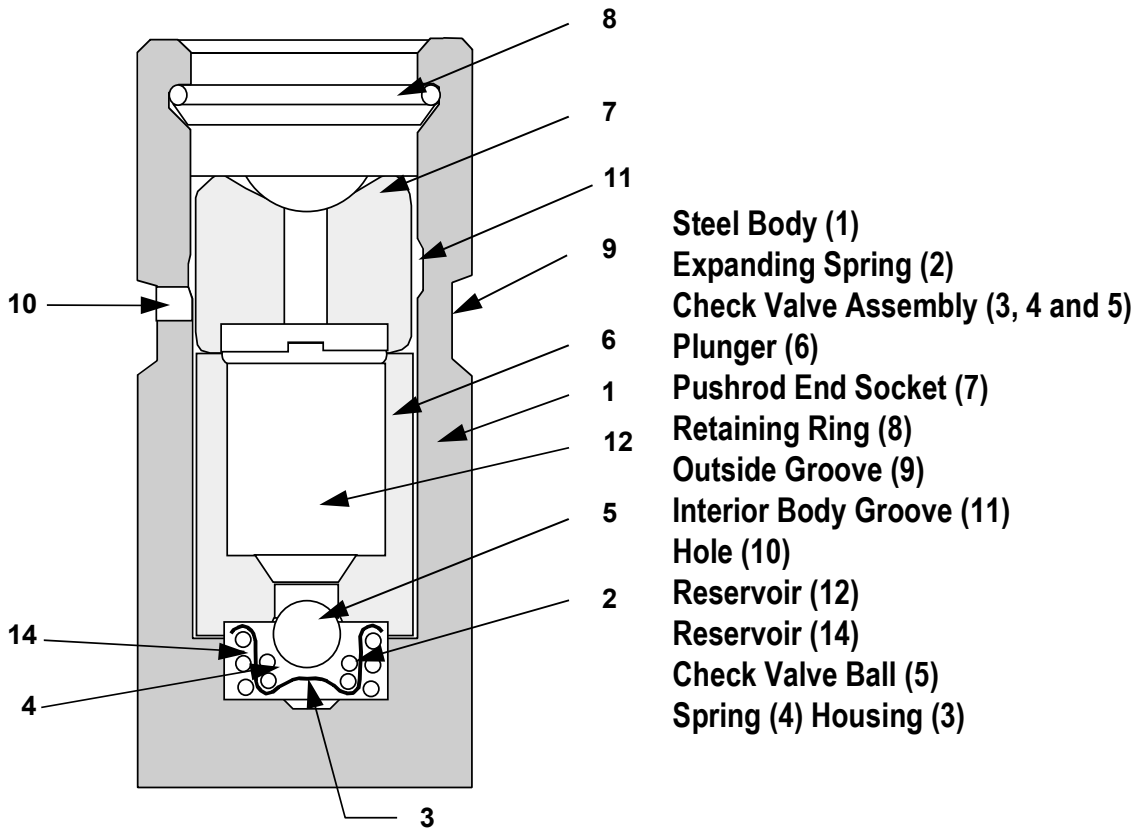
HYDRAULIC LIFTER CROSS SECTION
